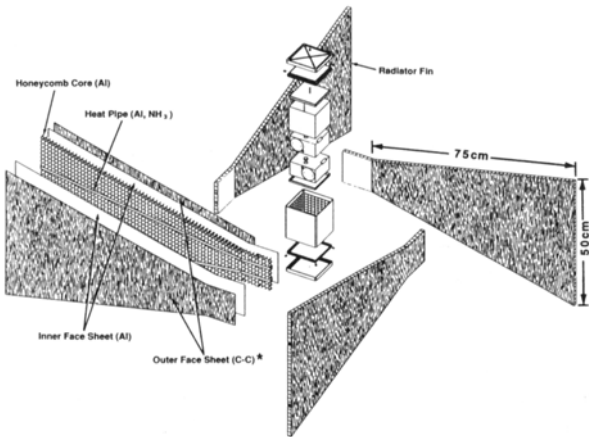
Exploded View of 75-Watt RTPV Generator and of Radiator Fin.
